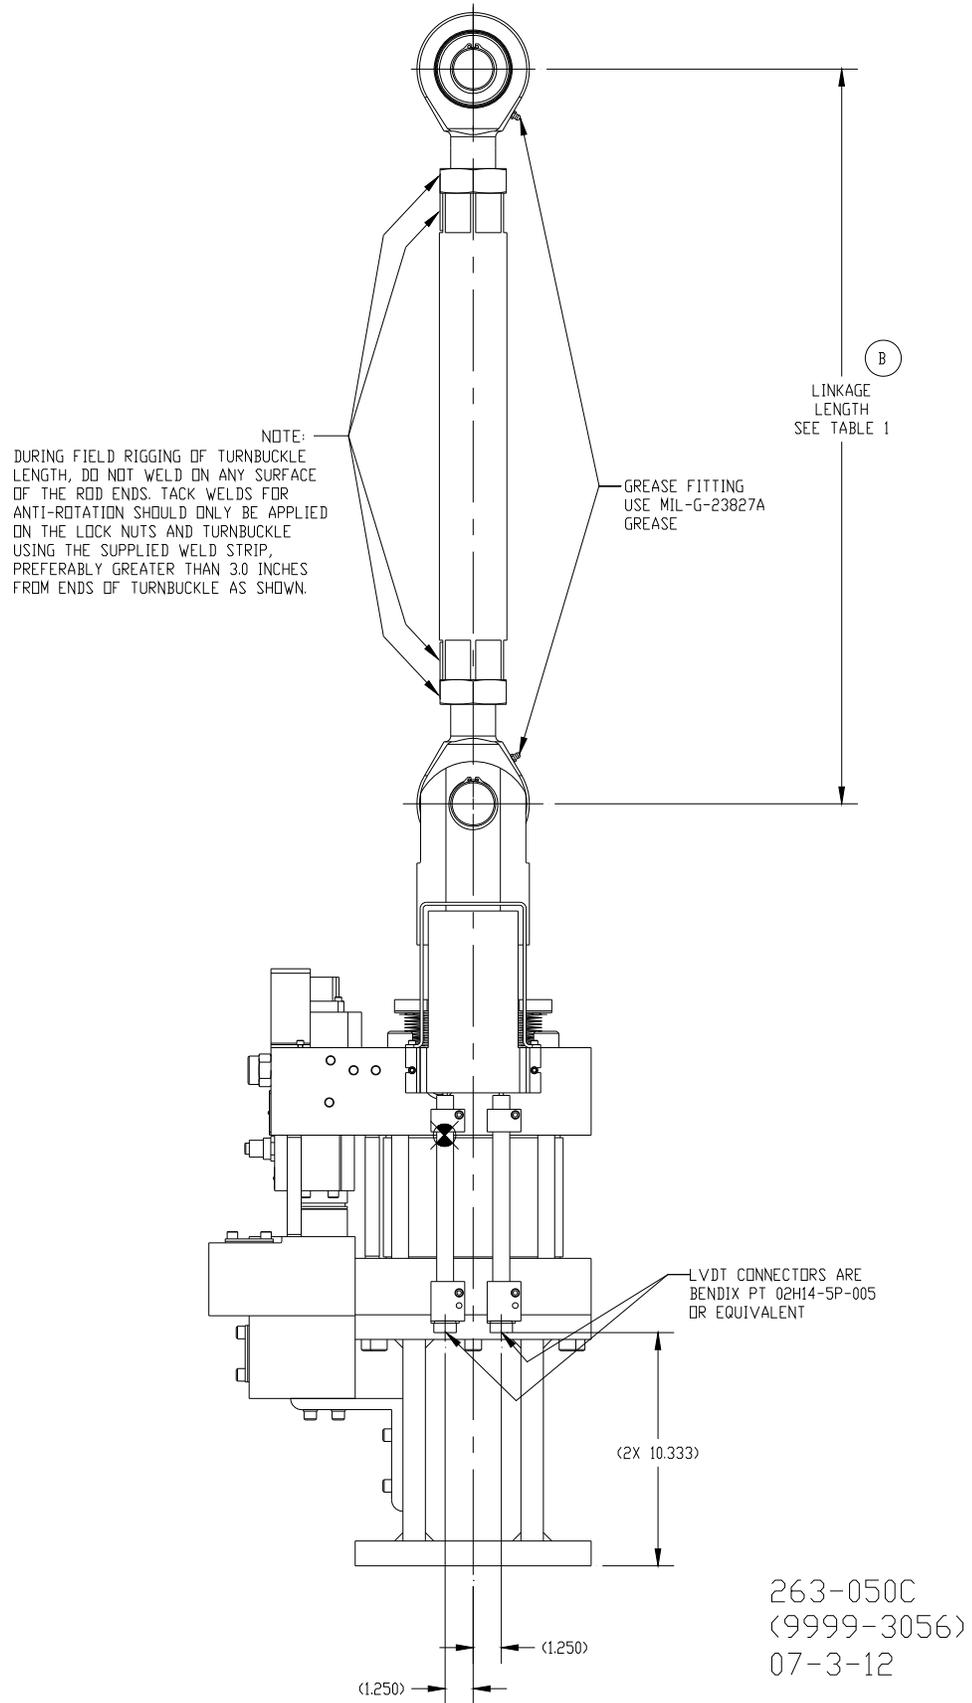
9F IGV Actuator, Low Pressure Trip (right side view)
